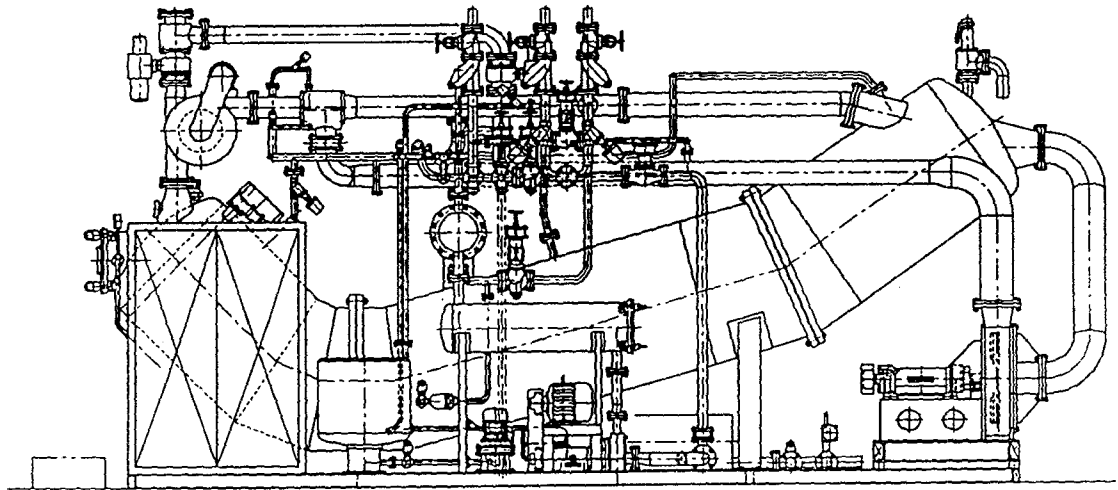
Front view of the 1 tube 2 chamber bent silkworm type dyeing machine.
